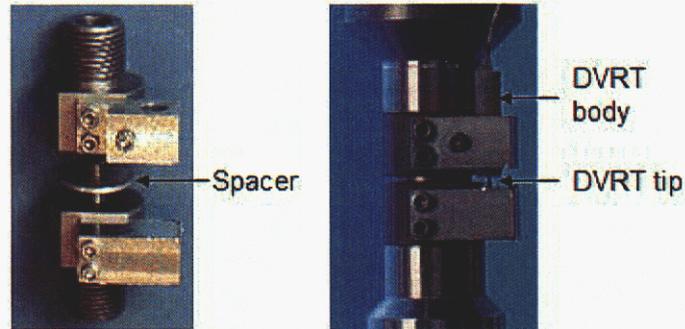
Tension (0°) test fixtures with spacer to set gage length at .200 in.
